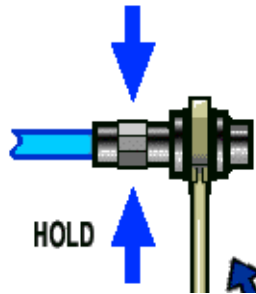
Pushing the Connectors Together and Rotating the Nut
